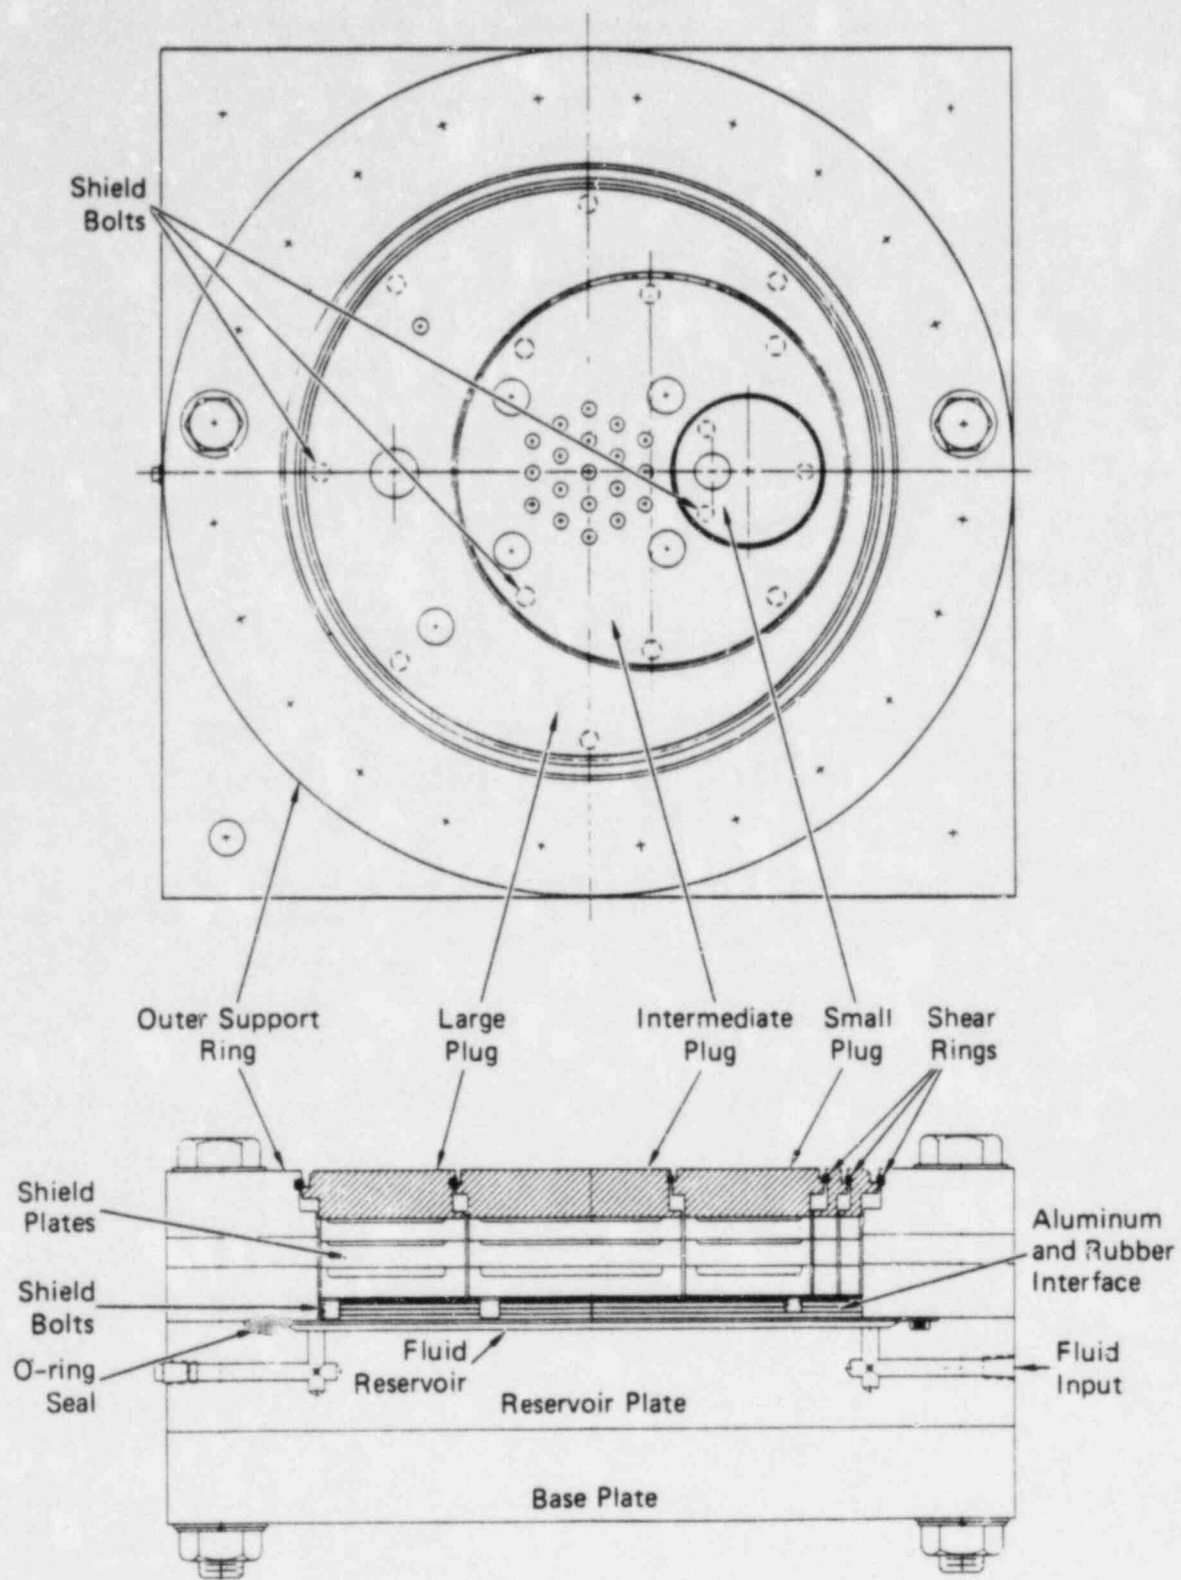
SHIELD PLATE DESIGNS FOR SM 7 AND SM 8
